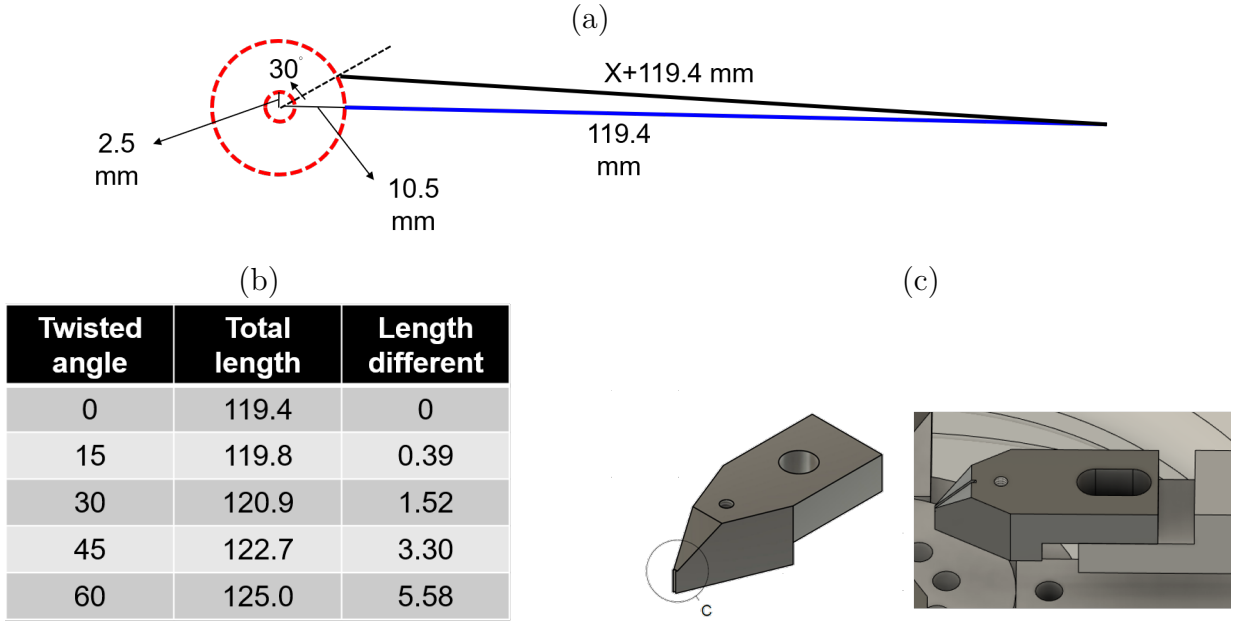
(a) The schematic diagram of the conical-wire array. (b) The table of the length different with different twisted angle. (c) The CAD drawing of the new wire array support.
